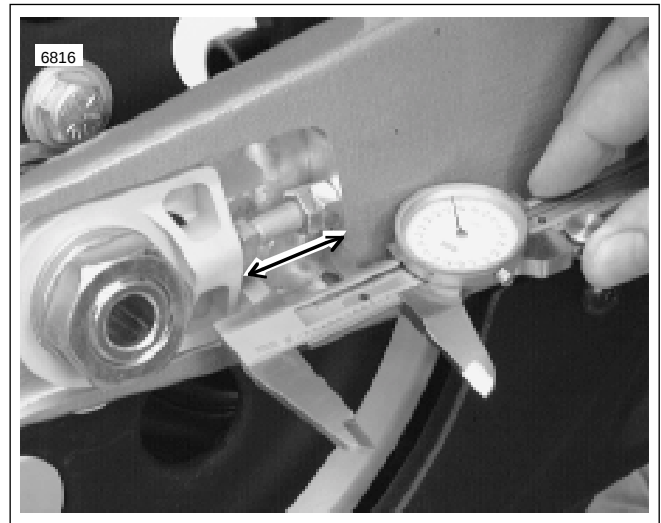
Checking Rear Wheel Alignment, Right Side Shown
